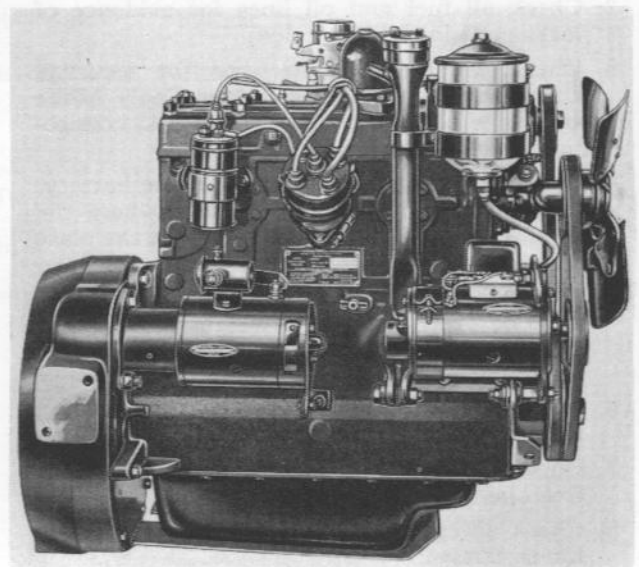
THE FOUR CYLINDER L-HEAD TYPE ENGINE — DISTRIBUTOR SIDE.
